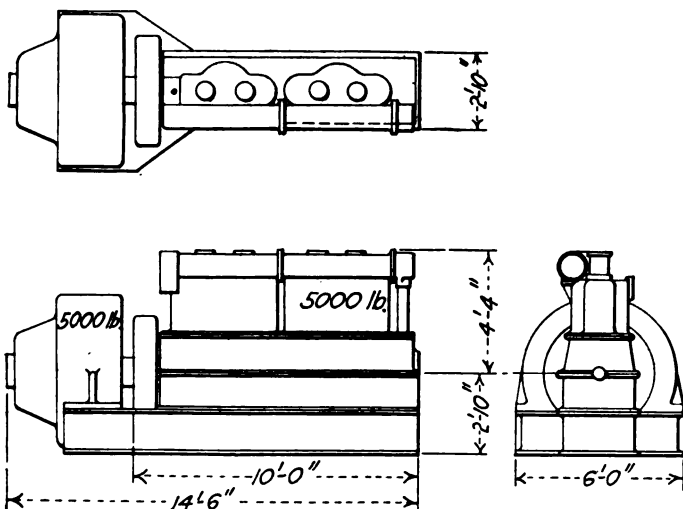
MOUNTING TWO OF THE ENGINES ON A COMMON BEDPLATE GIVES A 100-KW. GENERATING SET
